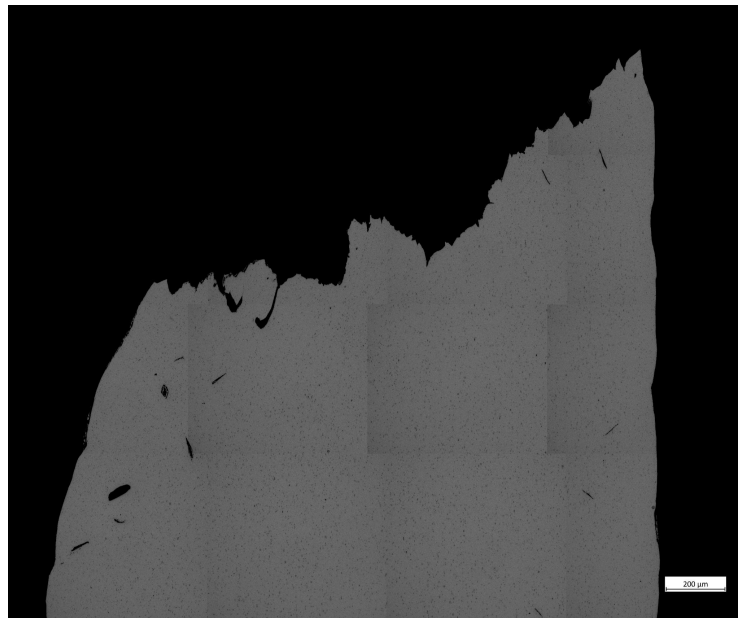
, the fracture surface of the first tensile test sample that has been water-quenched and peak-aged.
